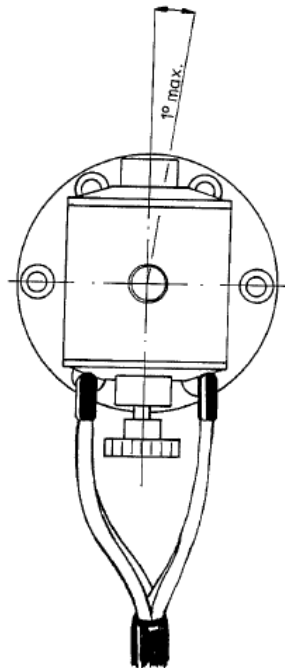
Angle tolerance of the spinning rotor gauge [57].
